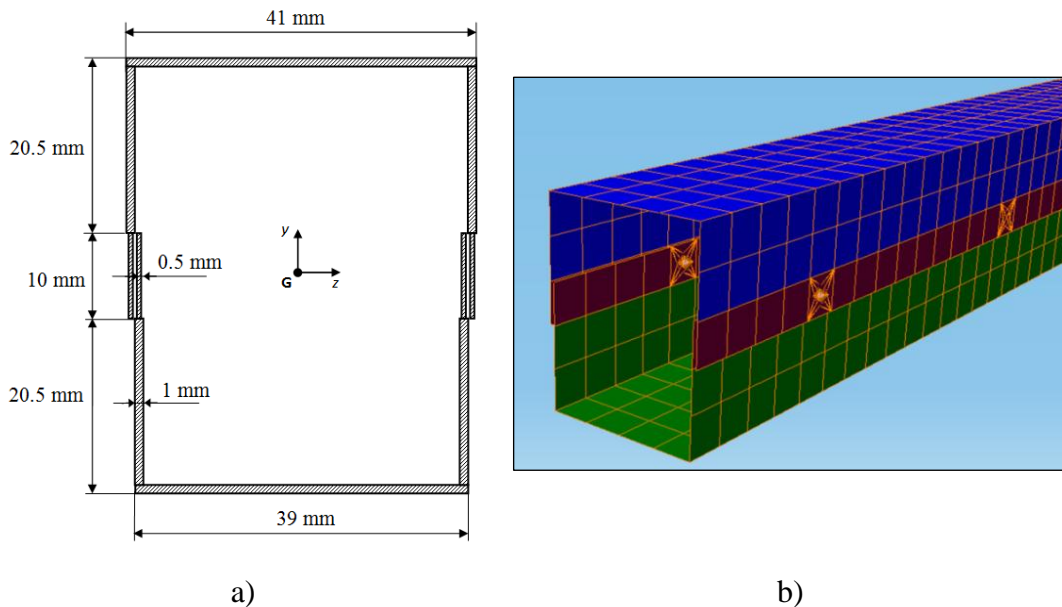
Application model: cross-section geometry of beams (a) and shell mesh of detailed 3D beam models (b) [35].
